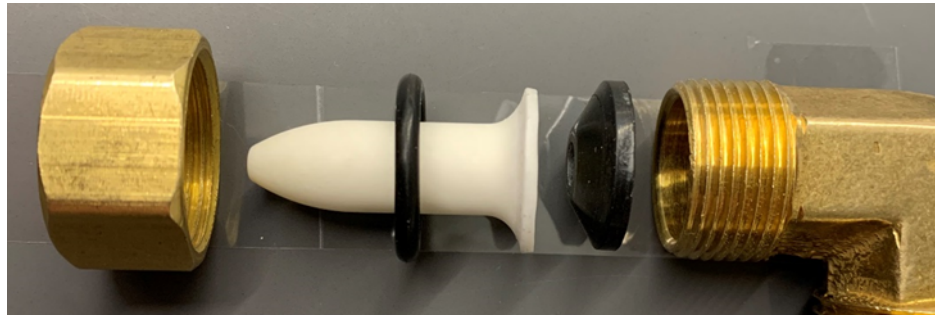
An exploded view of the parts used to secure the nozzle during the pressure tests. From left to right; brass collar, rubber o-ring, ceramic nozzle, flared rubber washer, and brass base.
